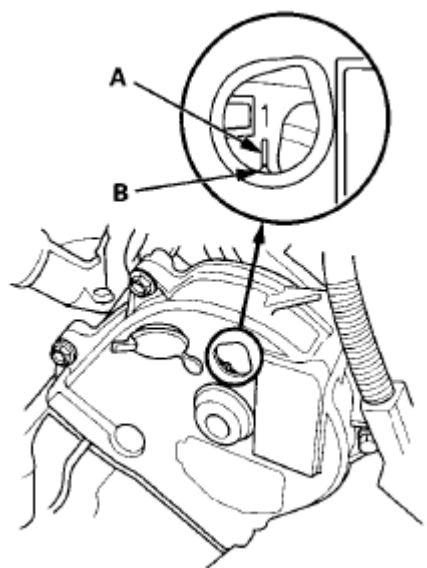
Identifying TDC Mark And Pointer On Camshaft
